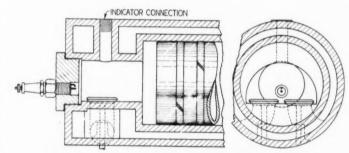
Diagram of engine cylinder showing shape of combustion chamber and location of indicator
